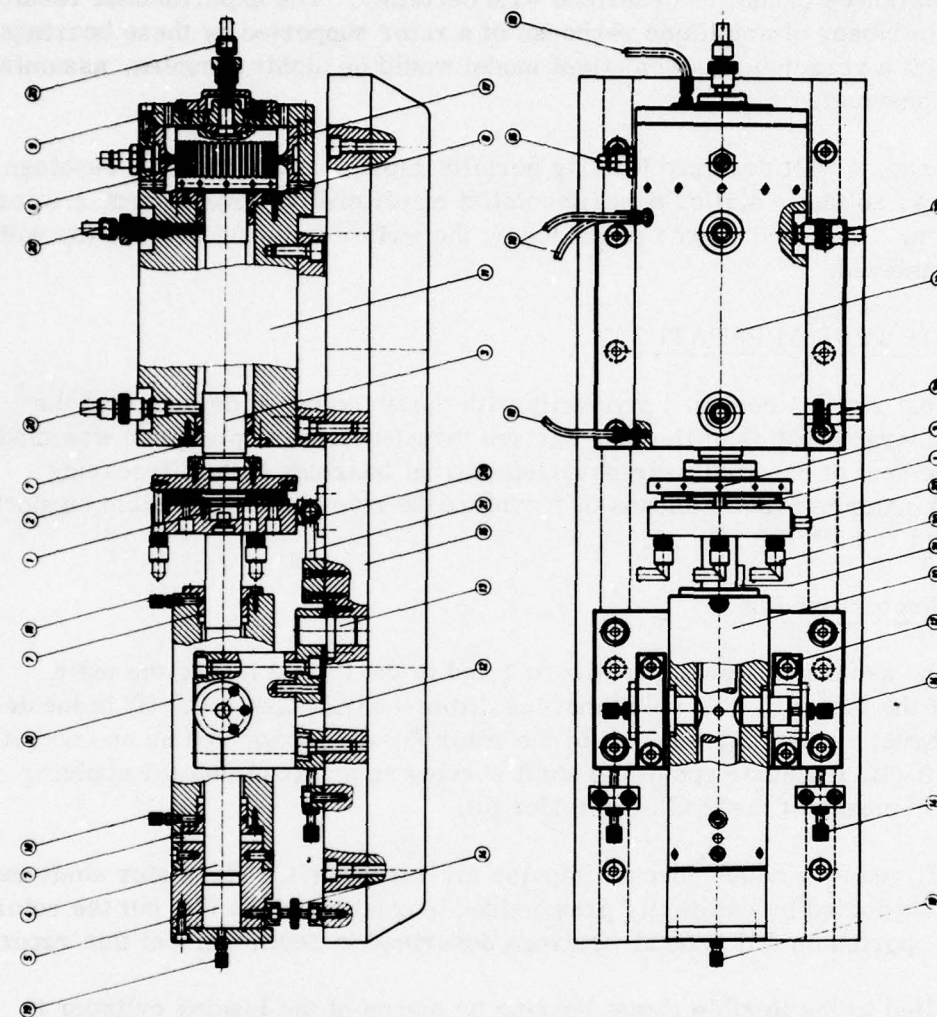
ASSEMBLY DRAWING OF TEST RIG
